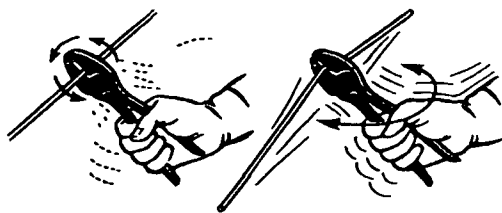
Wire should be cut with the cutter knives swung up and down, at right angles to the wire (as shown at left). Do not bend wire back and forth (as shown at right). Be sure to keep cut ends under control. Stand back when cutting wires so that if an end snaps back, it cannot reach you.
